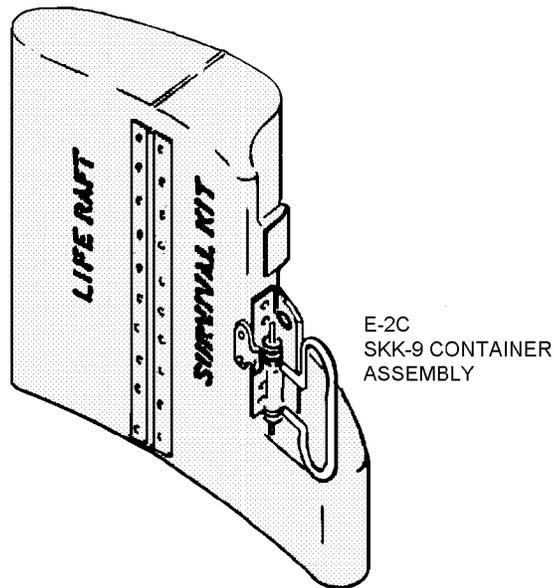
Packaged LRU-18/U Liferaft Assemblies
